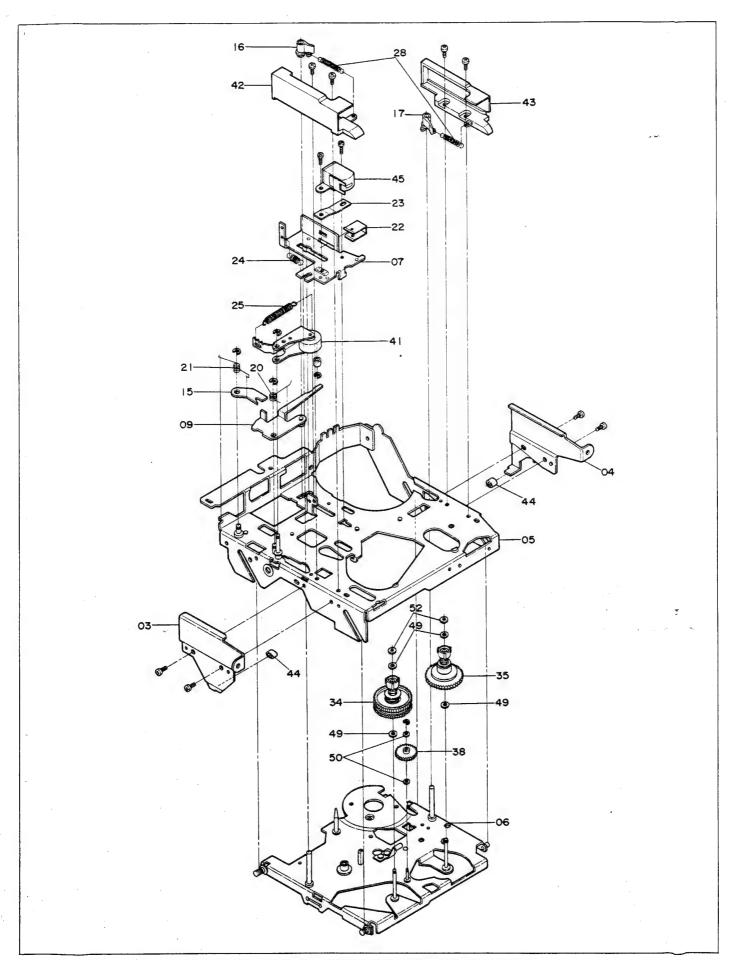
MECHANISM EXPLODED VIEW (UPPER SIDE)
